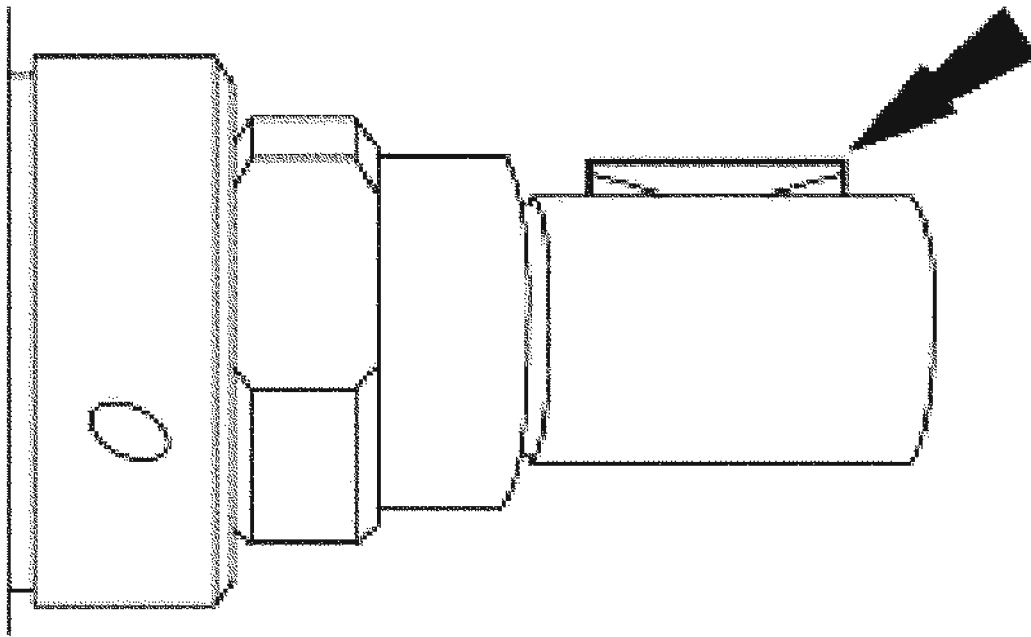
Identifying Special Tools (2 Of 2)
